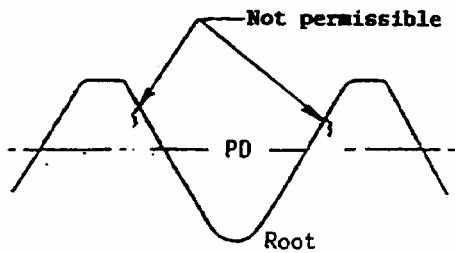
LAPS ABOVE PD EXTENDING TOWARD ROOT, ROLLED THREAD
